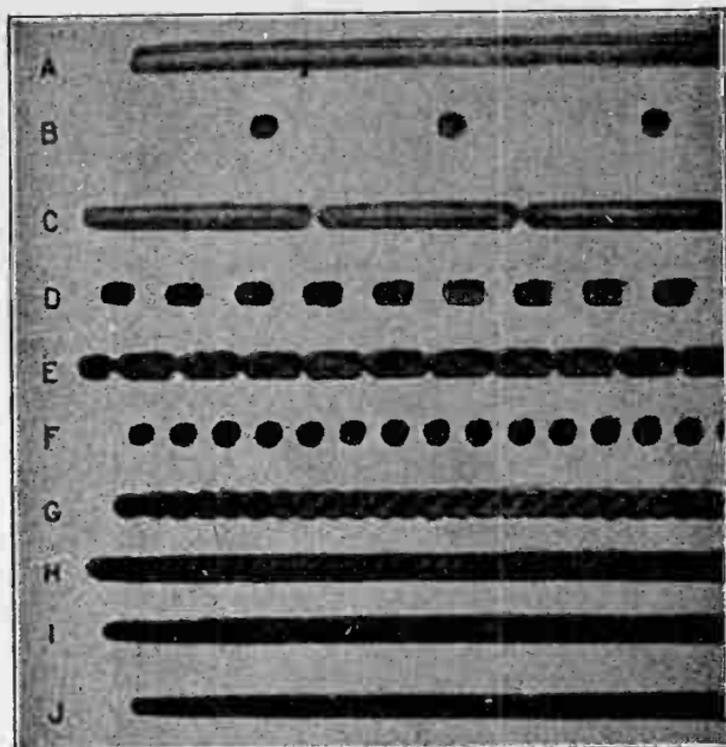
Resistance welds made at approximately 7 feet per minute by line welder controlled by a control panel using grid controlled vapor discharge tubes.
